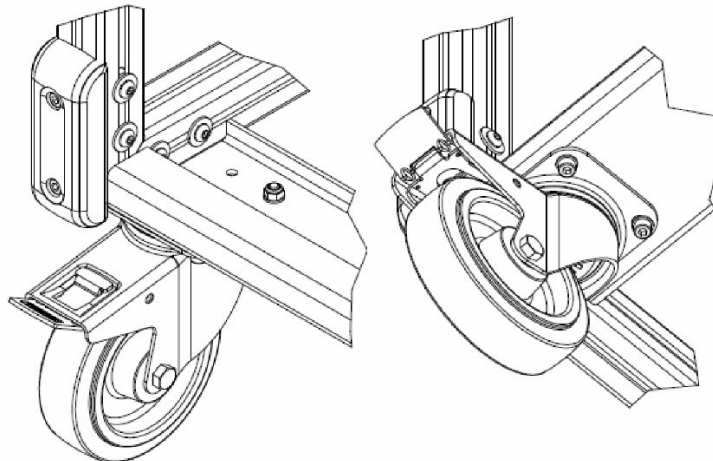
Position of bolts and nuts for 160-mm (6.30-in) wheels
